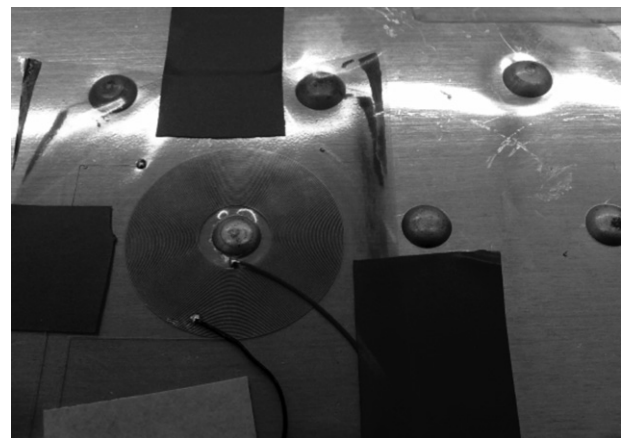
Eddy current sensor attached (the tape used here is for demonstrative purposes) on an aluminium sheet with rivet connections. The sensor fits exactly on top of a rivet and monitors a possible crack appearance.
